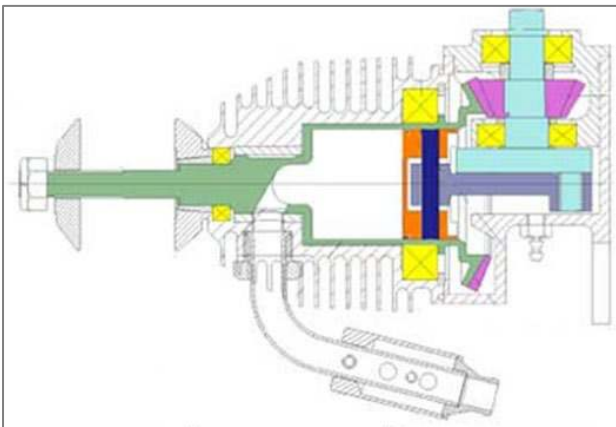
Section through the RCV SP “Rotating Cylinder Valve” model aircraft engine.
